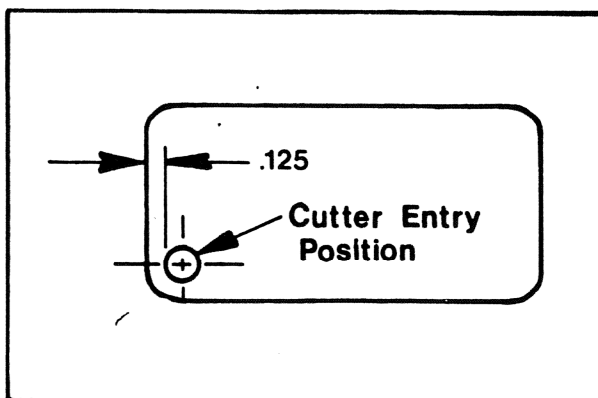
Inside Cutter Positioning Rectangular Frame
